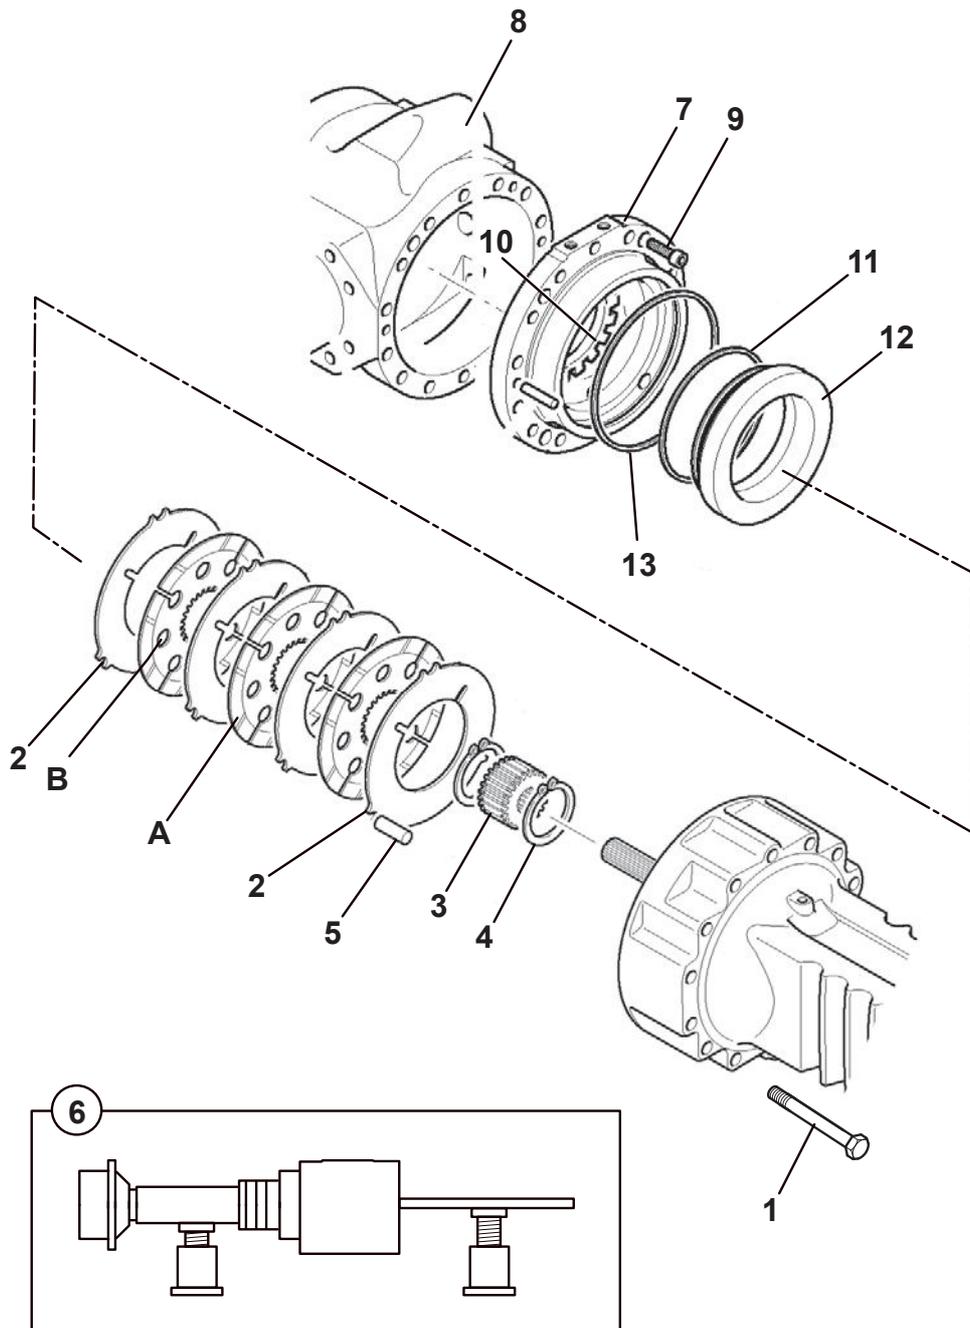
40 Series Integral Brakes - 3 Piece Axles
